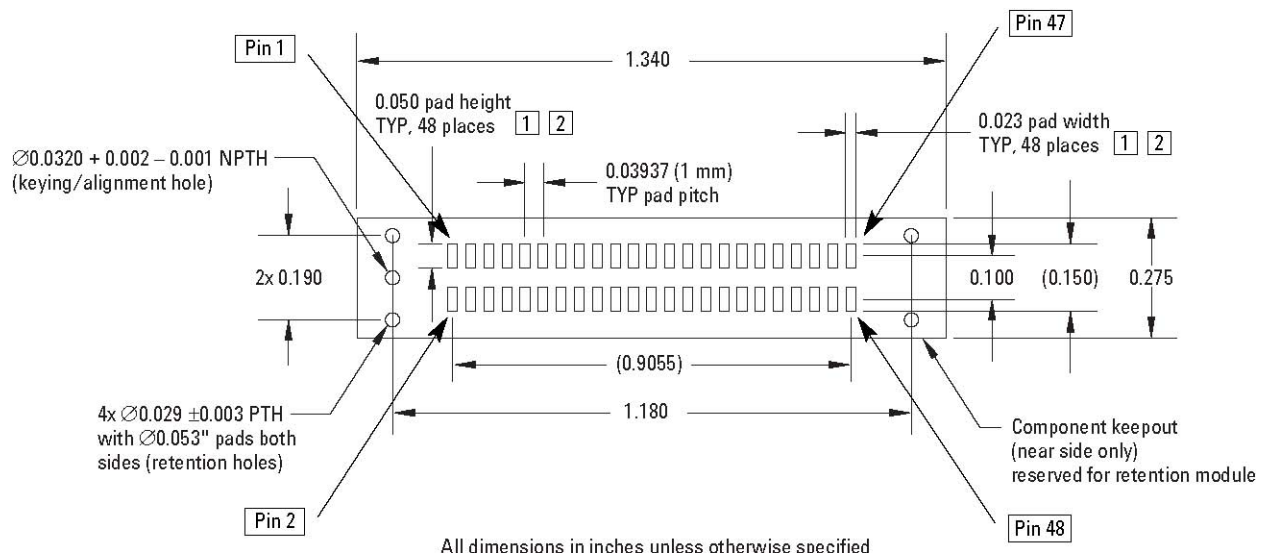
PCI Express LAI industry standard full size footprint dimensions, pin numbering, and specification
